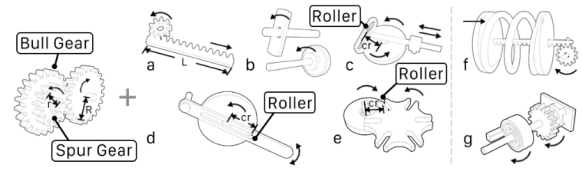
For non-instant motion types, kinetic units combine geartrains (pairs of bull and spur gears) and kinematic transmission mechanisms: (a) rack-and-pinions, (b) axels or revolute joints, (c) Scotch yokes, (d) crank-and-slotted-levers, and (e) Geneva drives. Helical springs engage with gears through (f) rack-and-pinions and (g) spiral springs are co-axial with gears for driving the geartrain.
